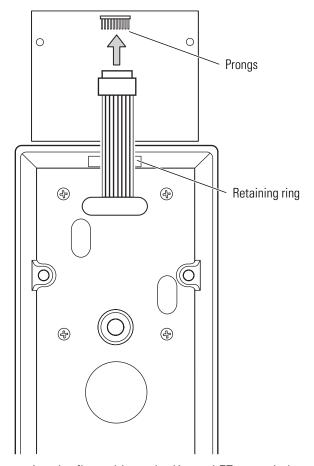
Connecting the flex cable to the Keypad EZ control electronics board
